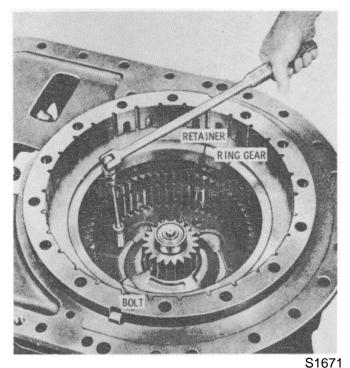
Installing Low-Range Ring Gear Retainer Bolts
